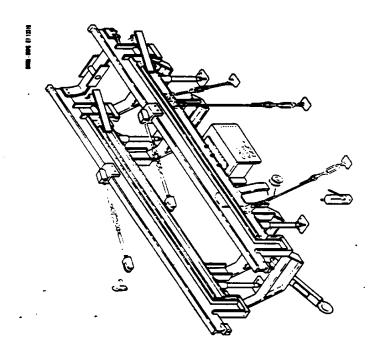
Test stand used for bare engine testing in an T-10 hush house.
